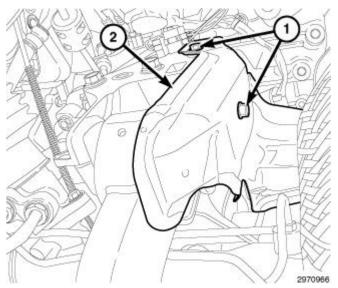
Rear Engine Mount Heat Shield & Bolts Courtesy of CHRYSLER GROUP, LLC
